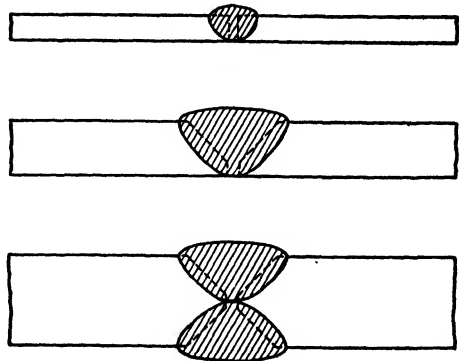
Time spent in cutting up grinding V grooves and in fitting or work preparatory to welding is time well spent. Pieces $\frac{1}{8}$ in. thick and under may be welded without grooving. Where ever possible make a V groove on each side of pieces over $\frac{3}{8}$ in. thick.
